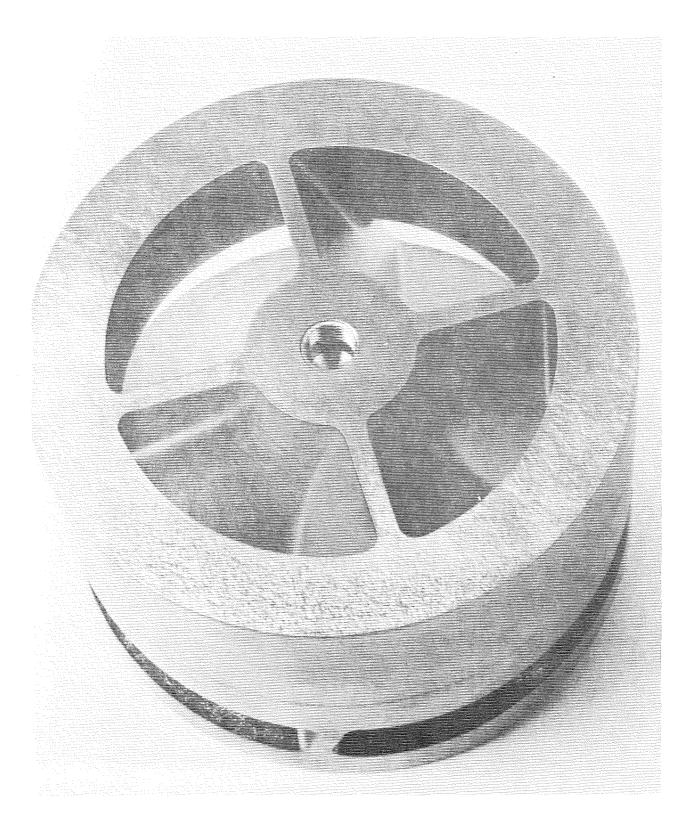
Final Simulated Impeller Showing Inlet Area After Chem-Milling 0.020 of an Inch Material From All Surfaces.
